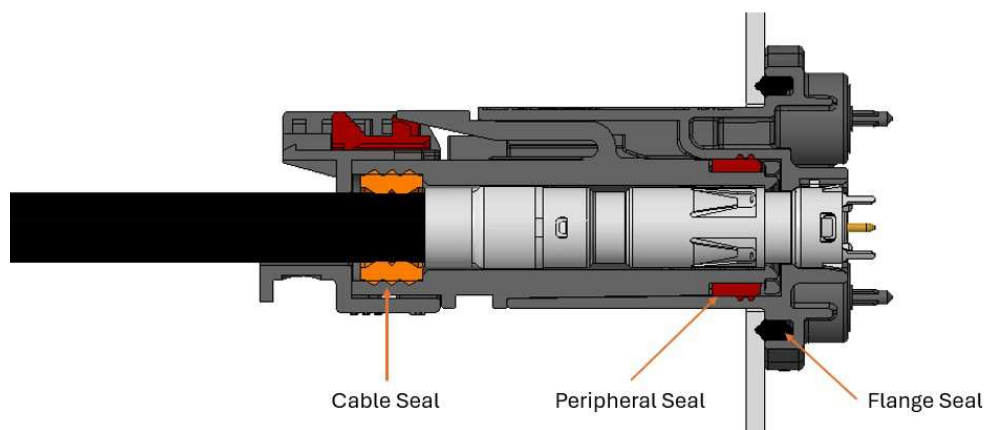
c: DT Highspeed Header Assembly mated to Socket Assembly
